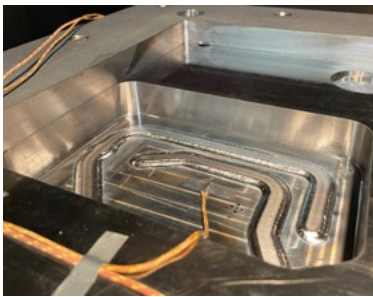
Pathfinder 1 channels 1 and 2 fully welded
